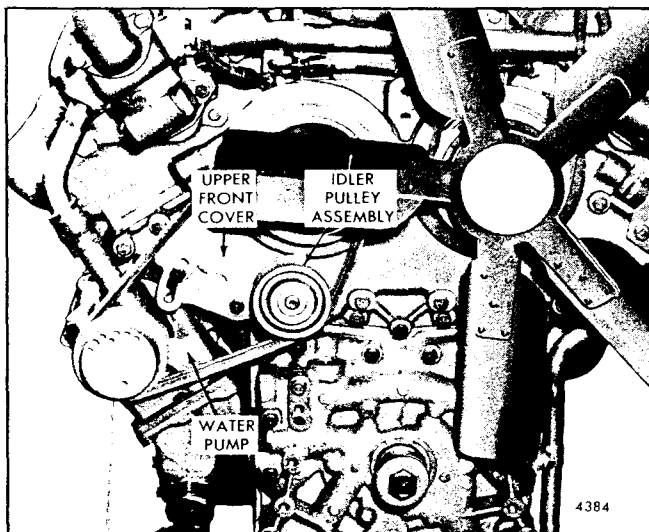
Typical Fresh Water Pump Idler Pulley Mounting
